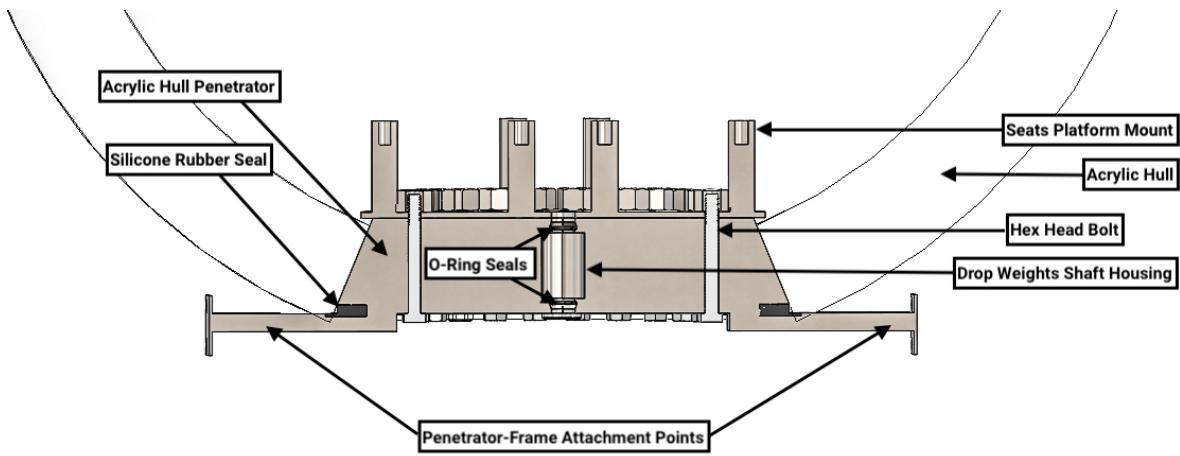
Cross-Sectional View of Main Acrylic Hull Penetrator
